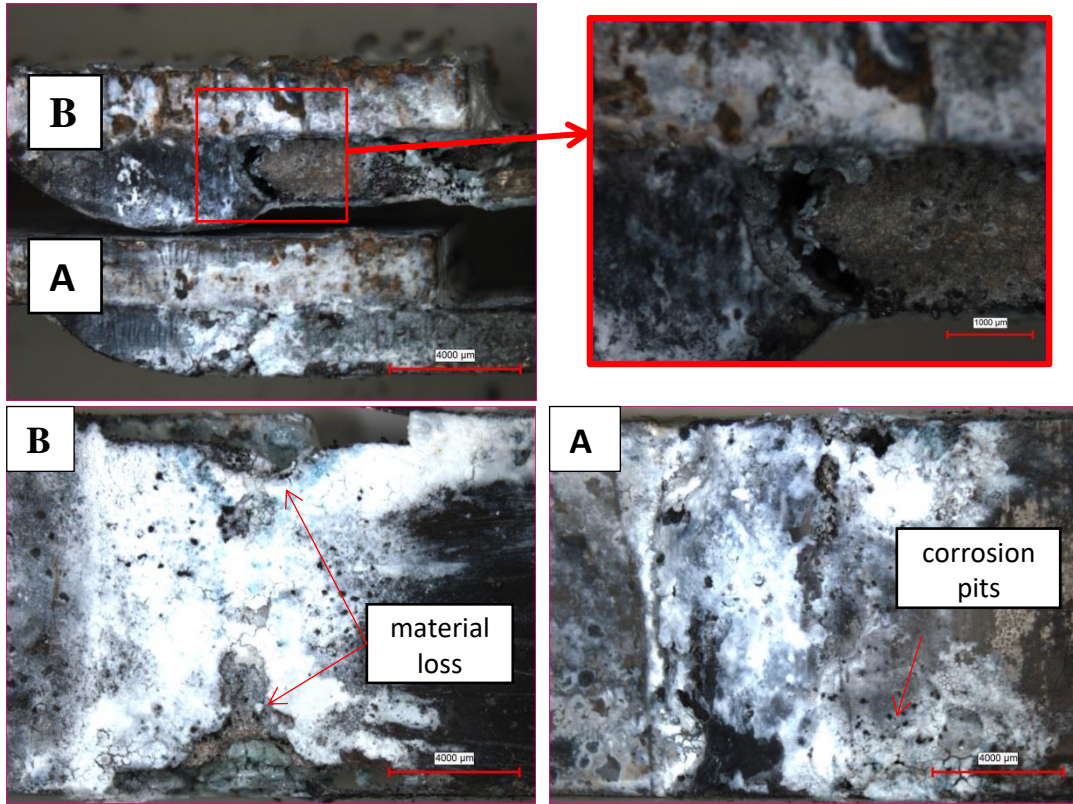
Tensile test specimens after corrosion test on Sample A and Sample B
